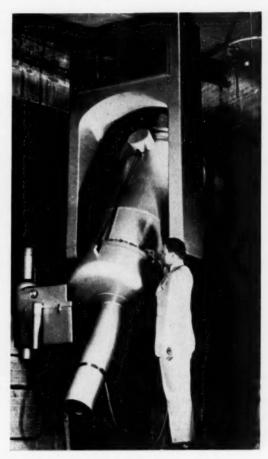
First super voltage X-ray machine of its type to be used in industrial radiography, this 2-million-volt Van de Graaff generator is capable of penetrating steel thicknesses up to 12 inches.
